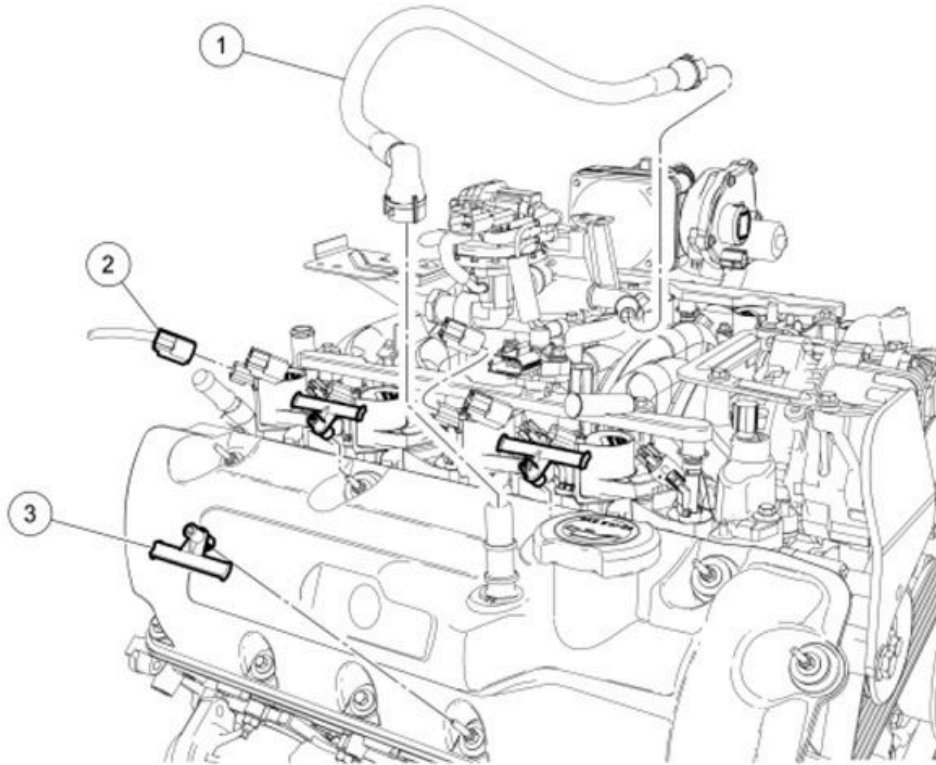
Identifying Valve Cover Components - RH (View 3 Of 4)
